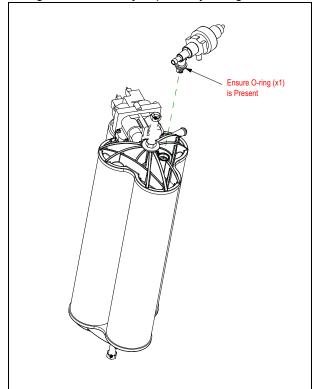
PRESSURE REGULATOR ASSEMBLY REMOVAL/INSTALLATION
